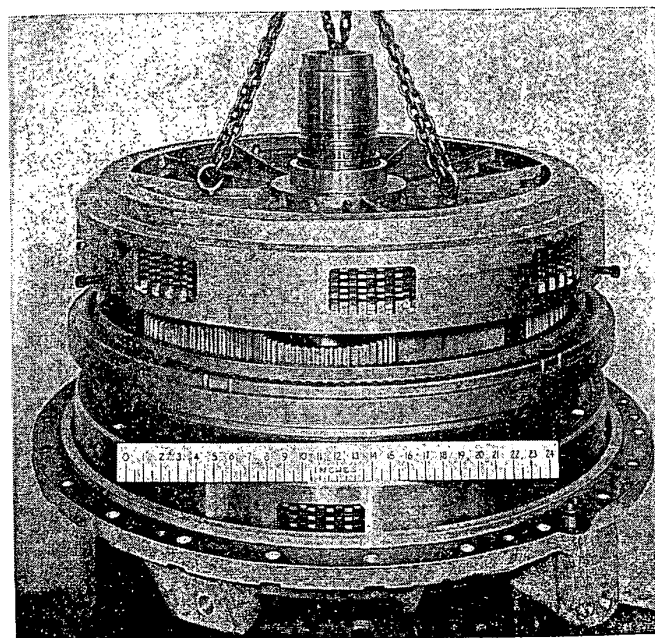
Partially disassembled view of marine drive unit rated at 2,500 hp. (Courtesy of Jered Industries, Inc.)
